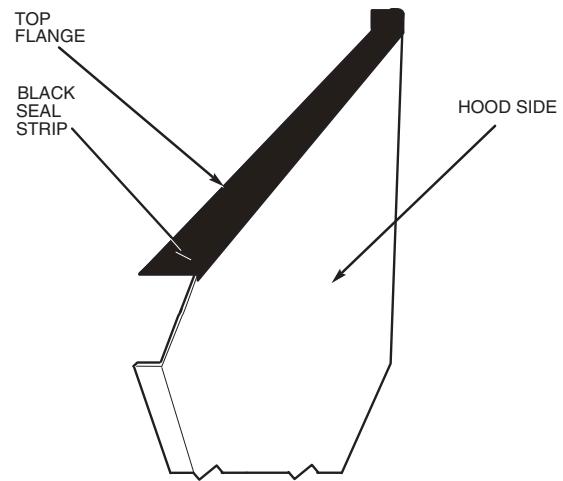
Adding Seal Strip to Top of Hood Sides
